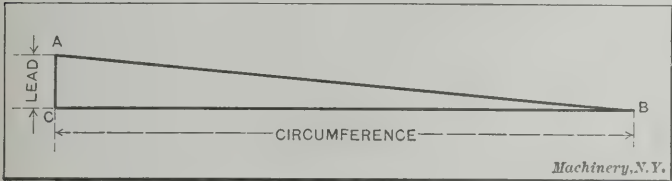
Diagram for Determining Angle of Threads in Thread Rolling Dies
